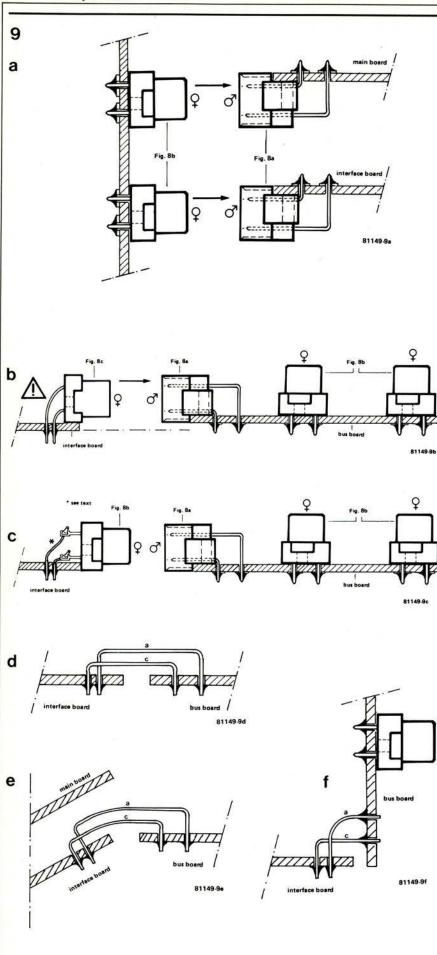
Detailed view of the electrical connections between the main and interface boards (9a) and between the interface and bus boards (9b, 9c and 9d).
